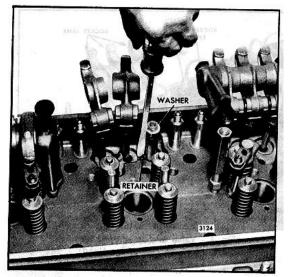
Removing Push Rod from Upper Side of Cylinder Head using Tool J 3092-01
